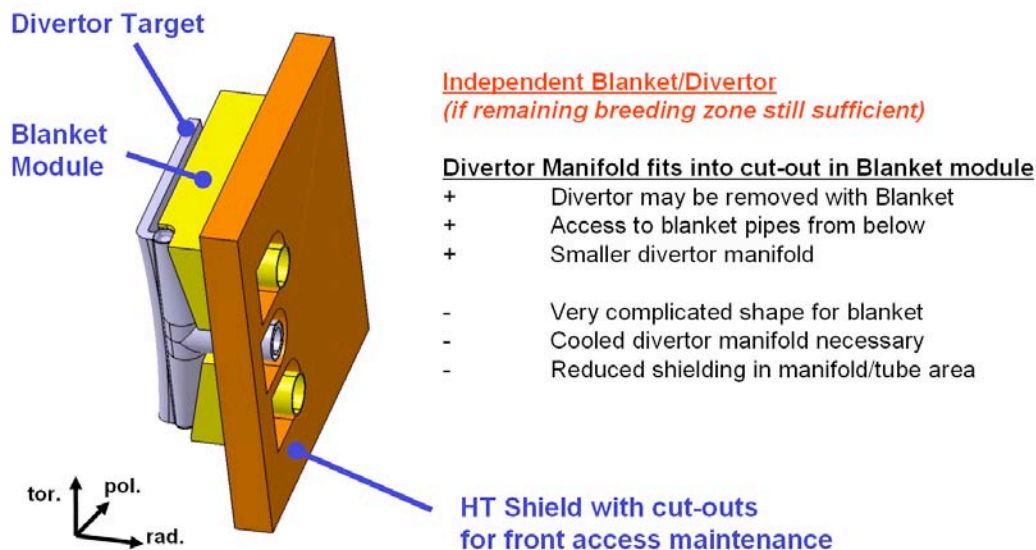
Cutting & re-welding scheme applying cut-outs in the HT shields along with a divertor target in front of the blanket module and a tapered divertor main manifold placed in a cut-out within a blanket box
